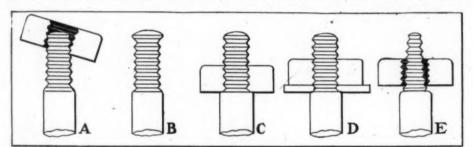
Illustrating the different ways in which threads are abused; also, defective thread
